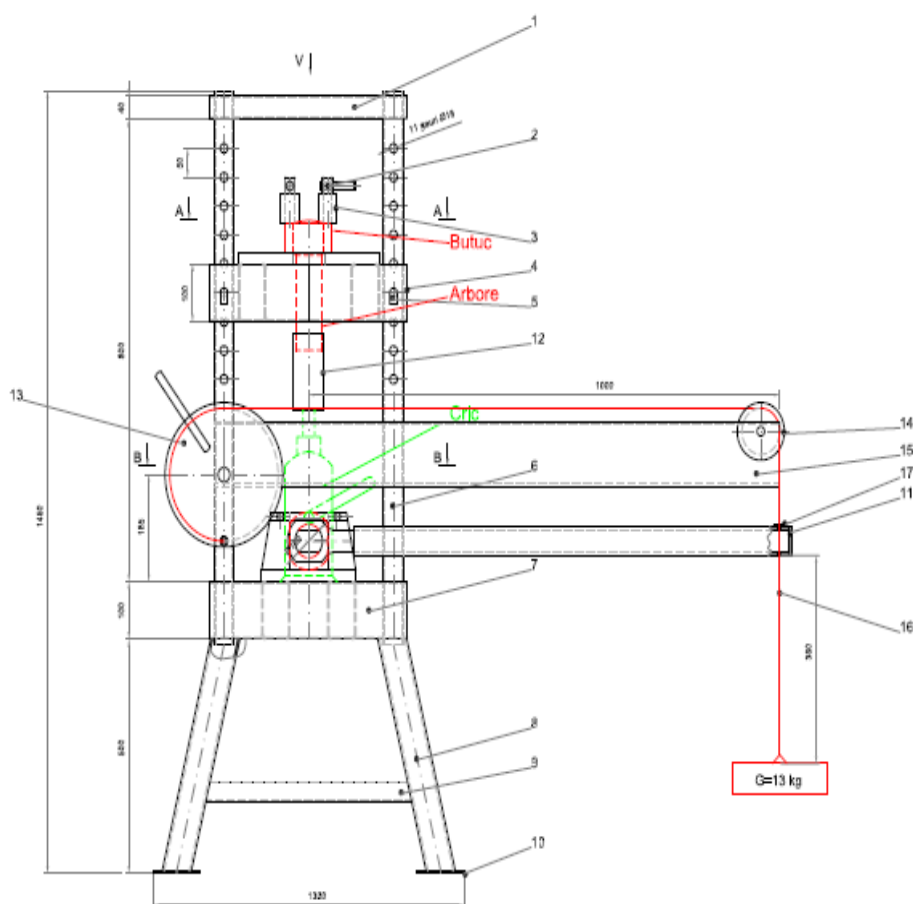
Stand assembly systems shrink: 1-top frame, 2-screw M22, 3-bracket fixing, 4-furniture frame, 5-fixing bolt, 6-column directions, 7-lower frame, 8-leg, 9-contact, 10-base, 11-support block, 12-bracket, 13-key moment, 14-washer, 15-U profile, 16-driven wheel, 17-wire wheel, 18-steel cable, 19-weight, 20-pawl, 21-lever.
